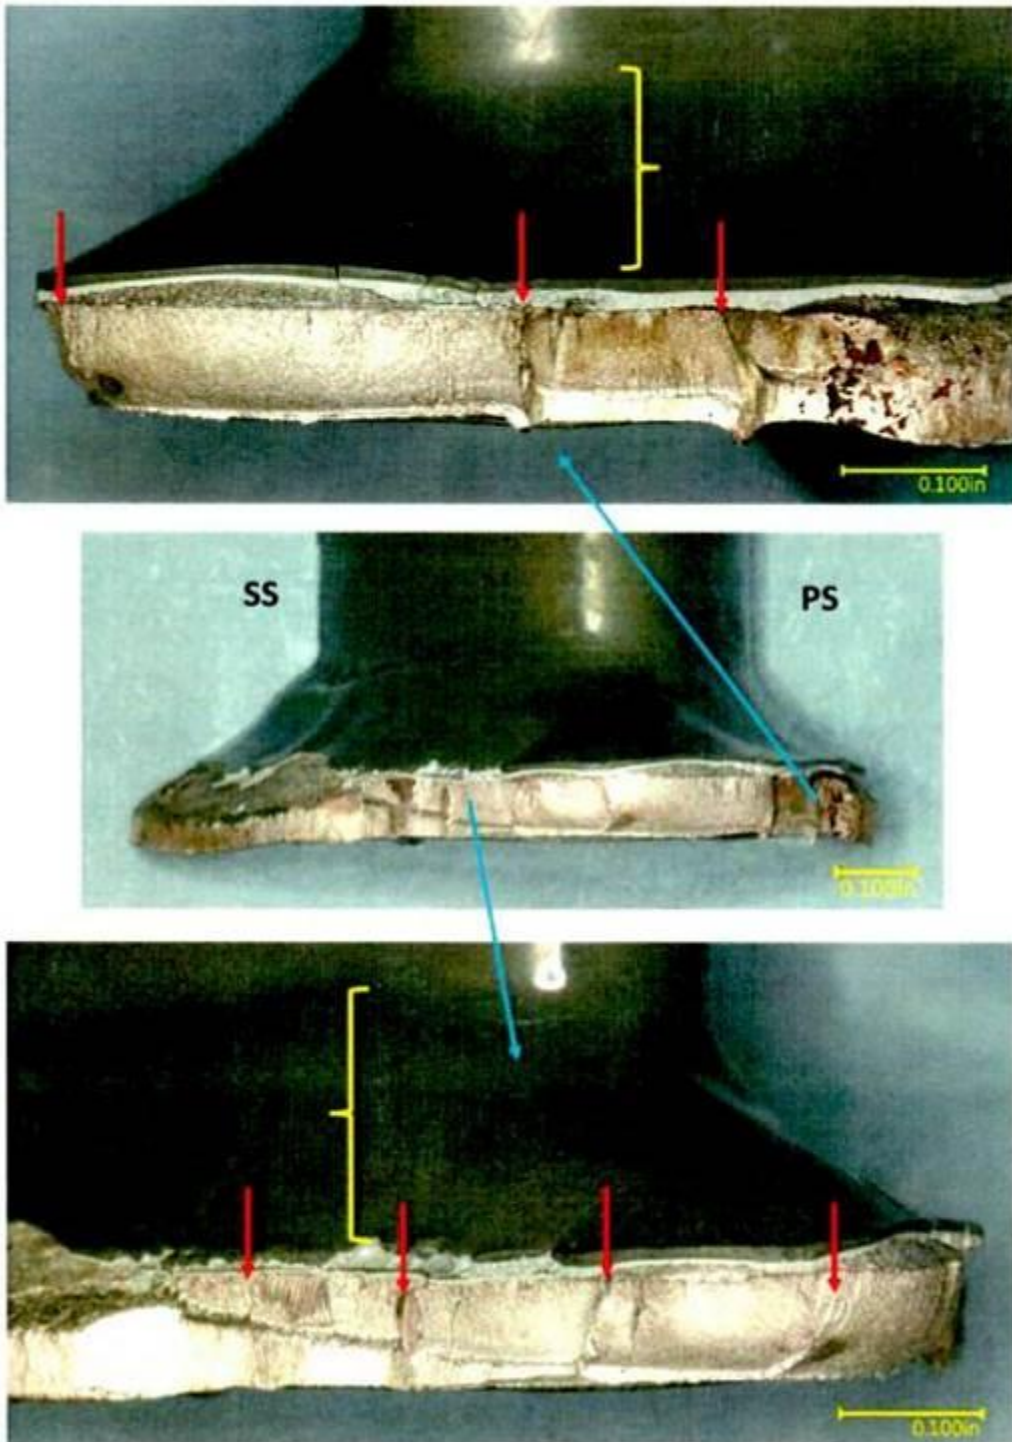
Digital microscope images showing the cleaned fracture surface on the blade. The yellow bracket indicates the weld on the blade. The red arrows point to ratchet marks.
